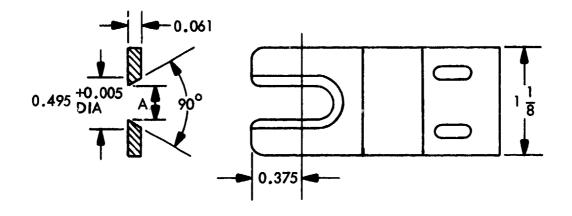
Spring (Ref. Dwg. No. 10541157) - Part 1.
